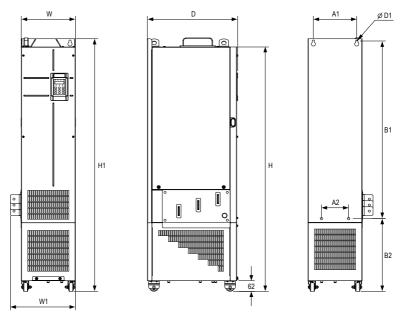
Overall and mounting dimensions of MD290T200G-L to MD290T450G-L and MD290T220P-L to MD290T500P-L
